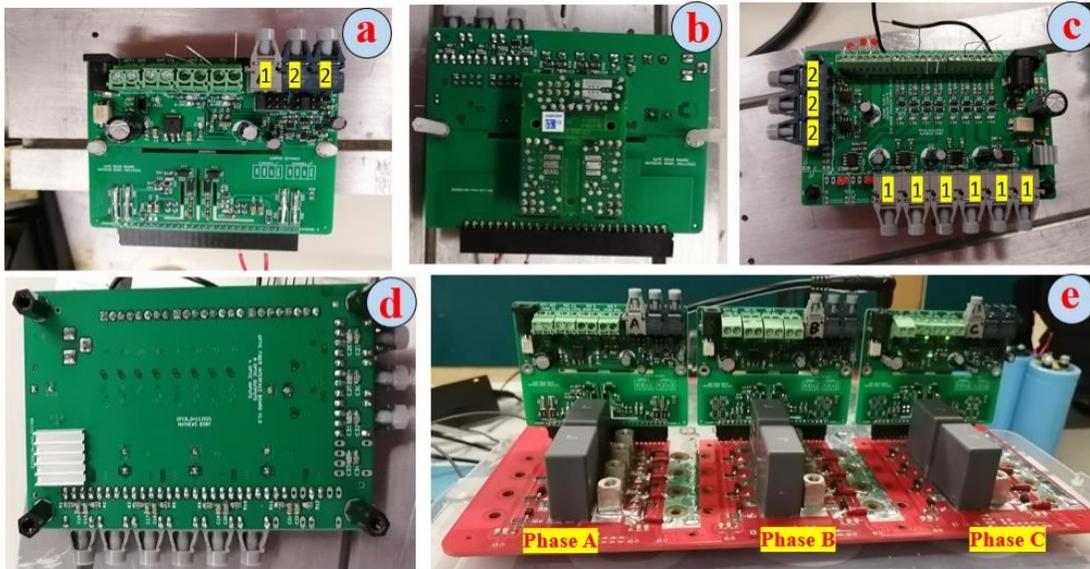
(a) Gate driver board top view, (b) Gate driver board bottom view, (c) Signal conditioner board top view, (d) Signal conditioner board bottom view, (e) Gate driver board mounted unto the inverter board
